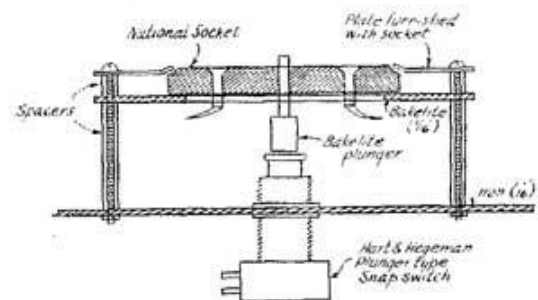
Rotatable Kinescope socket with high-voltage disconnect. A plunger-type switch is kept closed so long as the tube is in the socket, but opens the primary circuit of the high-voltage transformer when the tube is removed.
